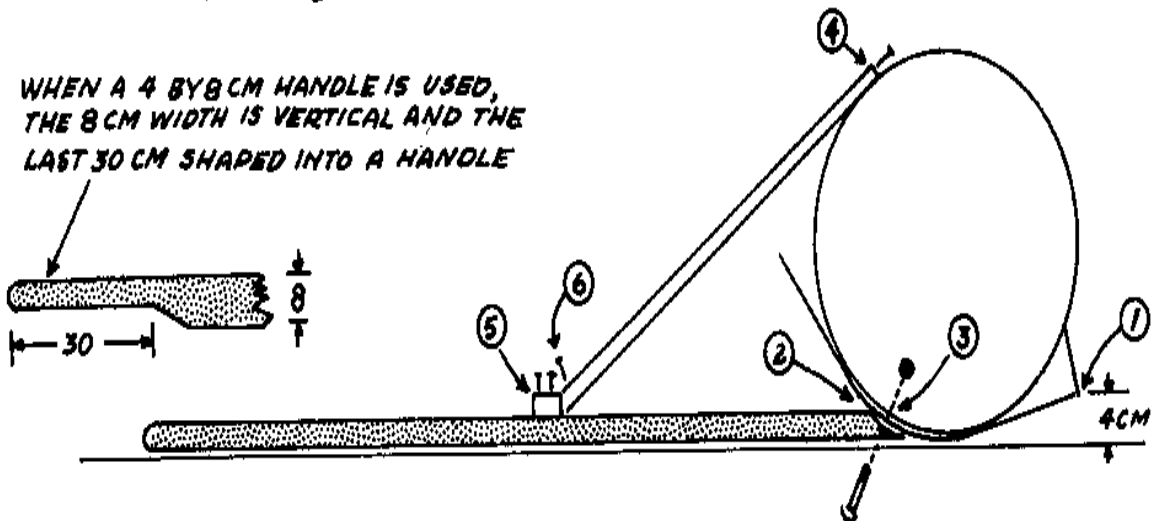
INSTALLING THE HANDLE AND HANDLE BRACE
